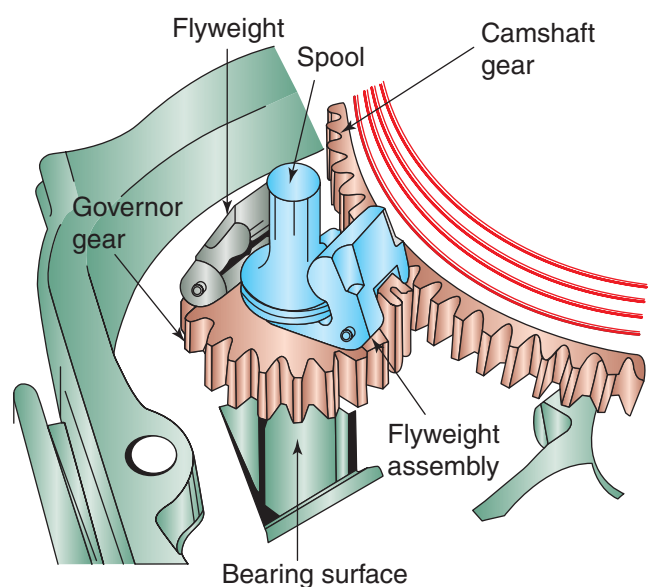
The centrifugal (also known as mechanical) governor operated with a gear that meshes with the camshaft gear.
